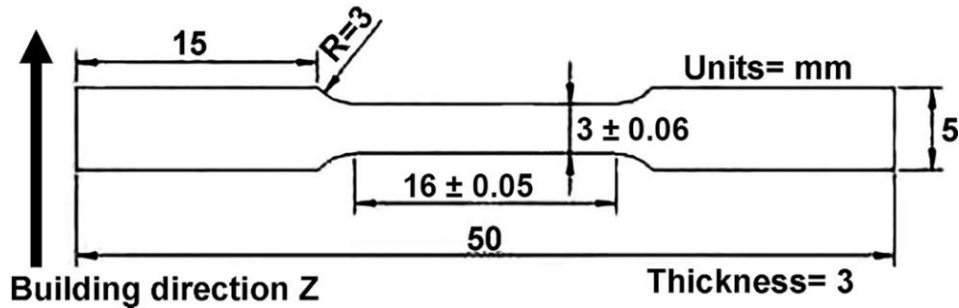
The shape and dimensions with primary tolerances of the specimen used in the tensile tests.
